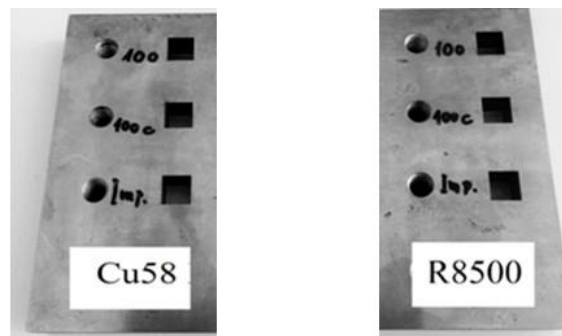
Experimental sample made from tool steel EN 90MnCrV8 using tool electrodes with shape No.1, 2
